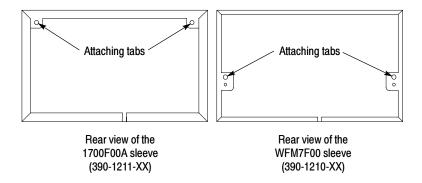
Rear view of the WFM7F05 sleeves, showing the locations of the attaching tabs and screws
